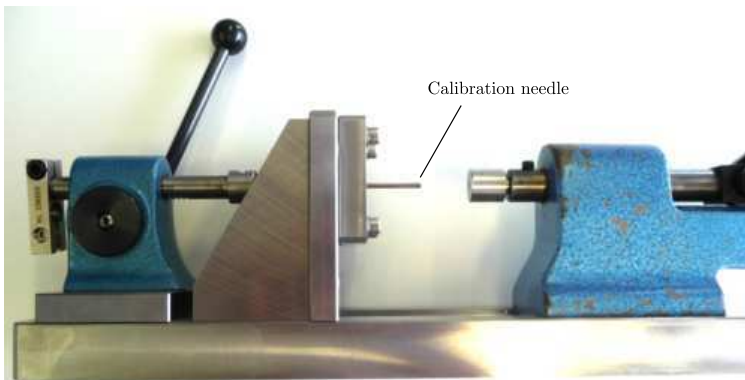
Bearing alignment and calibration tool, used to press the bearings in the sample cylinders.
